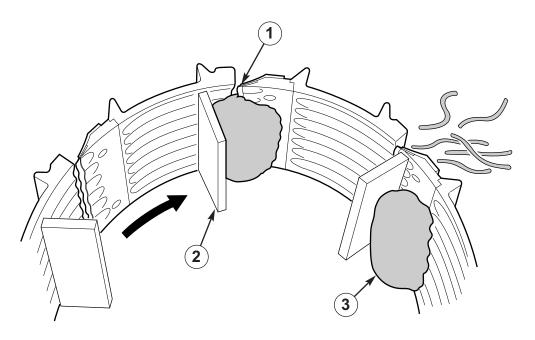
Cutaway view of cutting head and impeller. (1) Knife, (2) Impeller (448 RPM speed), (3) Product
